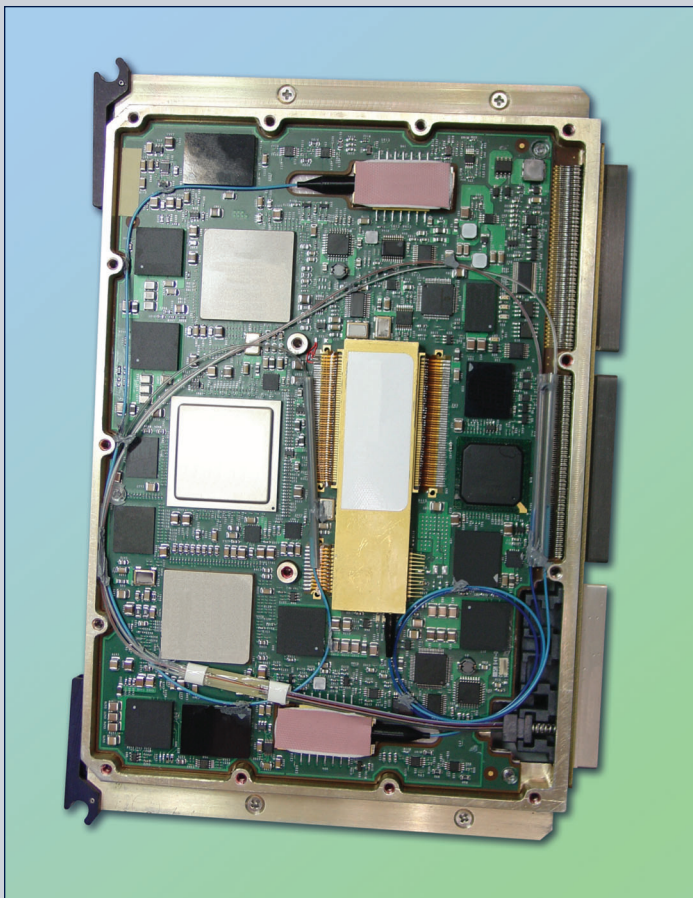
Circuit card assembly combining fiber optic components with electronics.
